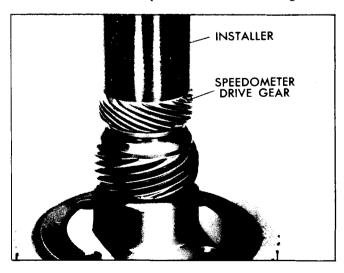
E-88 Installing Steel Speedometer Drive Gear
